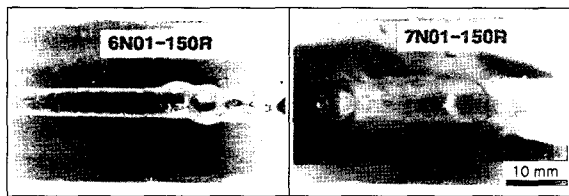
Macroscopic appearances of surface crack in the hot cracking test
